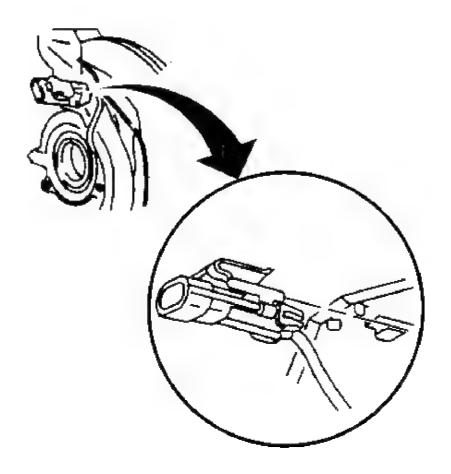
Disconnecting/Reconnecting ABS Front Wheel Speed Sensor Courtesy of GENERAL MOTORS CORP.
